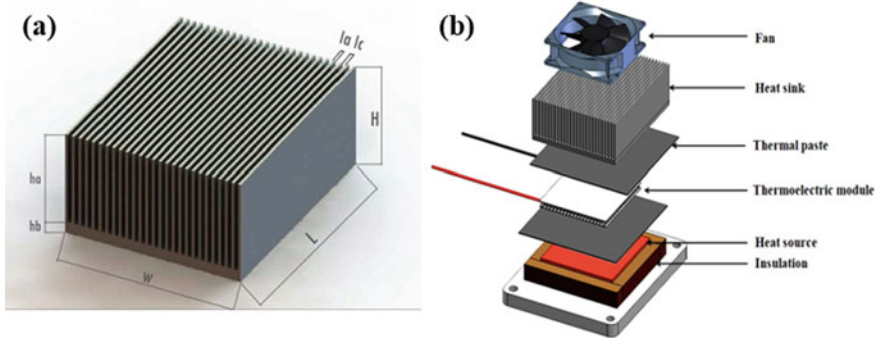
a Heat sink. b Assemblage of heat sink, fan with the thermoelectric cooling module on the heat source (CPU)
